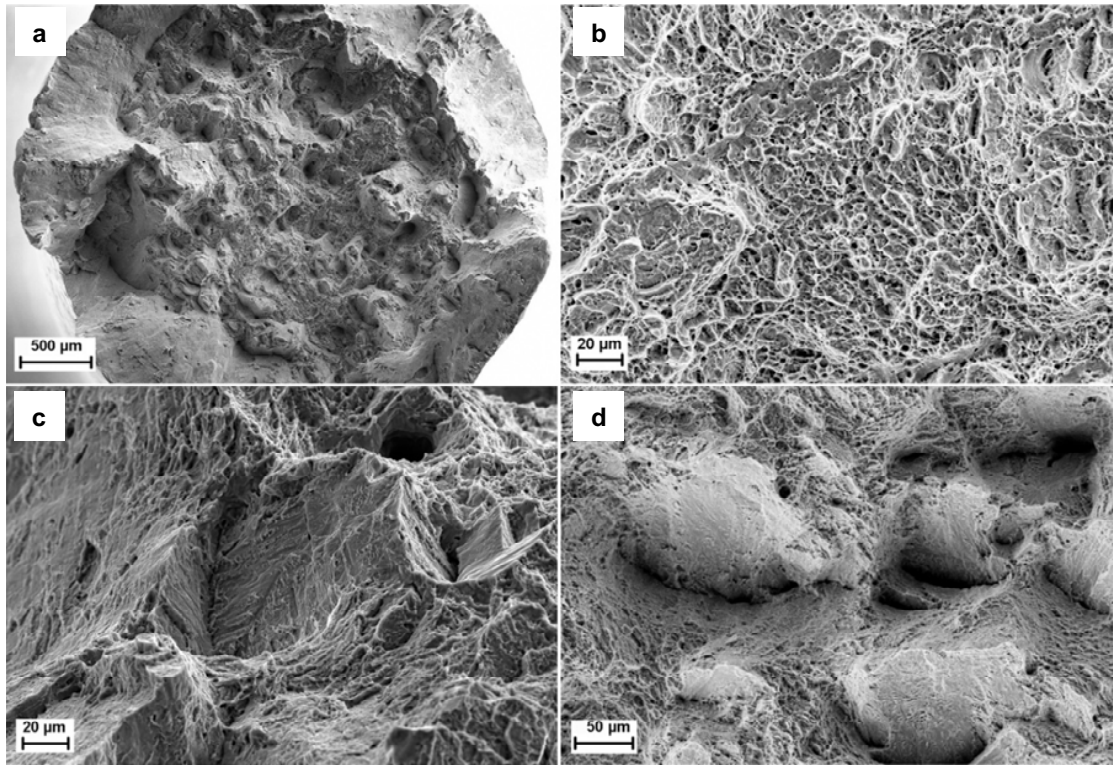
Fractured surface: (a) cup-and-cone, (b) dimples, (c) and (d) quasi-cleavage facets in as-built SLM Ti6Al4V.
